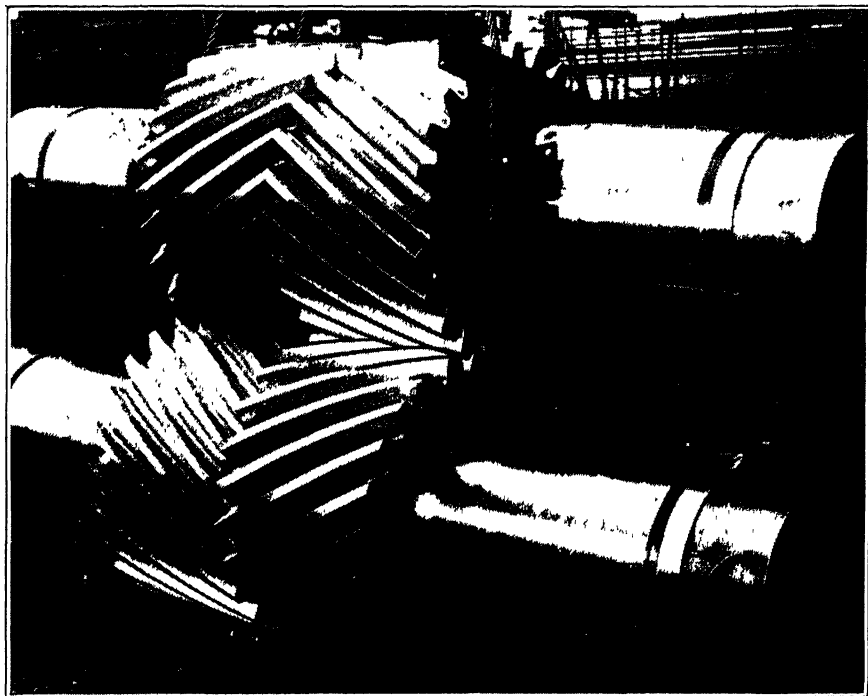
Herringbone Gears for Rolling Mill Drive.
